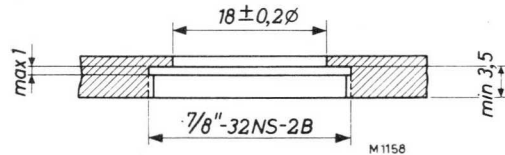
Recommended mount ²⁾ (dimensions in mm).
